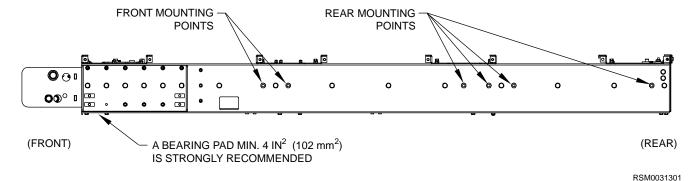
LIFT ENCLOSURE MOUNTING POINTS (RH SIDEVIEW)
